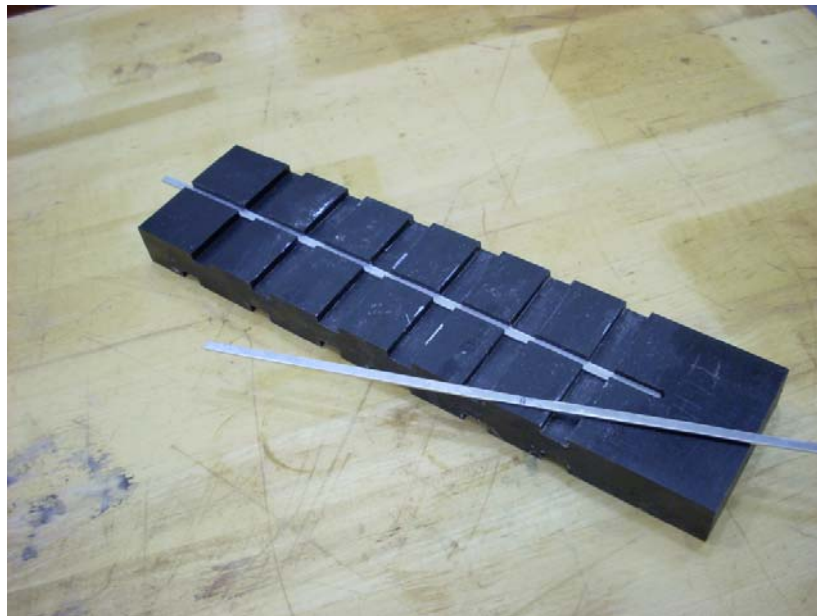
ASTM D695M Tabbing Fixture with Aluminum Tab Displacers
